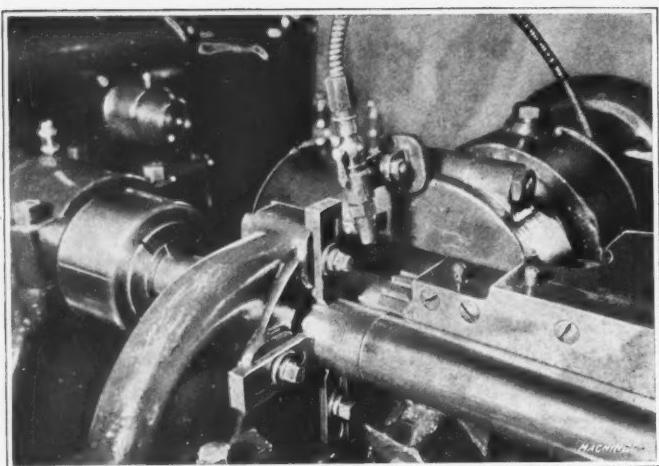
Detail View of Lees-Bradner Machine milling Screw Thread with a Multiple Type of Cutter
